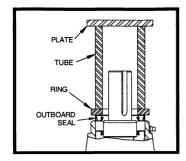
Placement of Tooling for Installation of Outboard Seal
